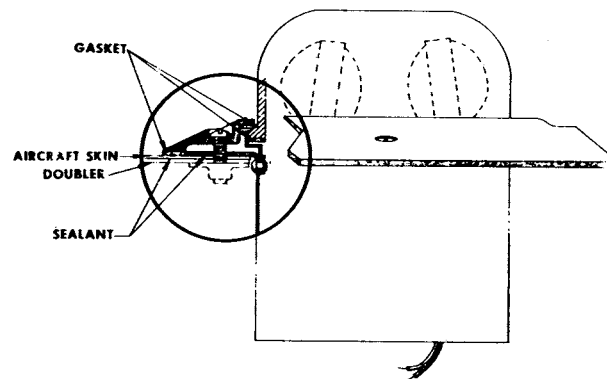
Typical rotating type anticollision light installation for pressurized aircraft.
